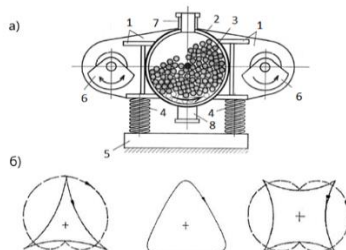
a) Vibratory mill with two independent unbalanced drives;
